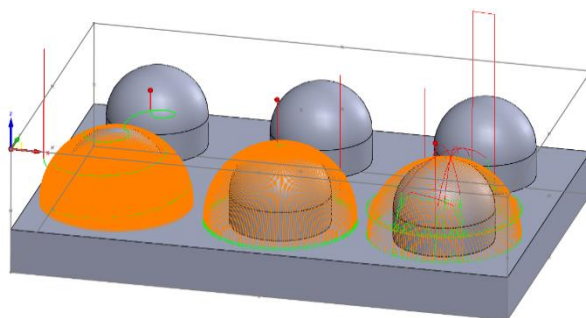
Toolpaths for 3-axis milling. From the left : Constant-Z, Radial and Linear
